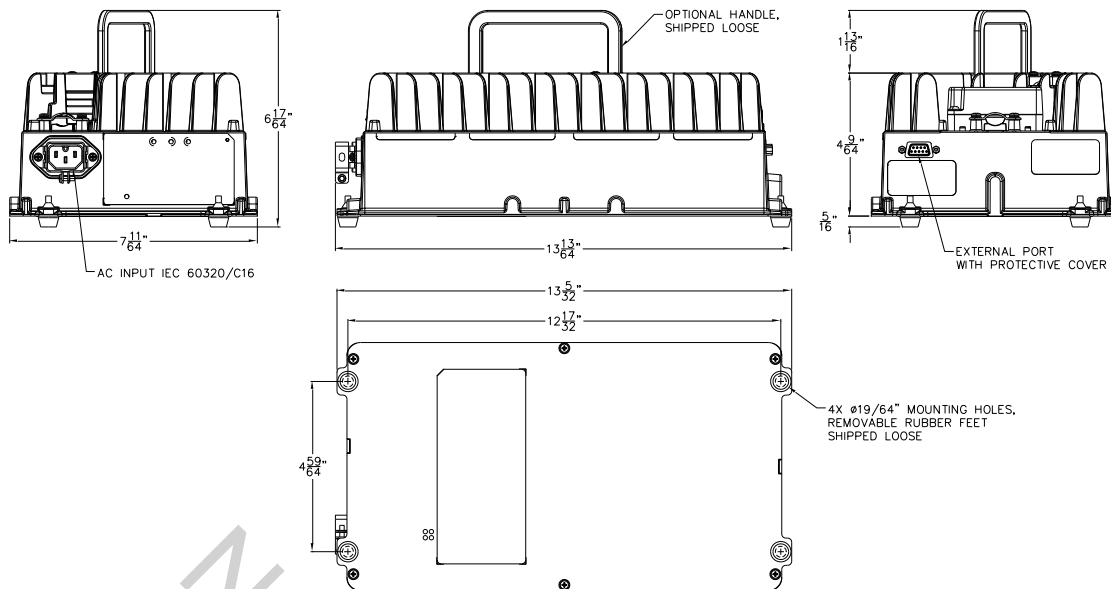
Charger Dimensions and Mounting Hole Locations
